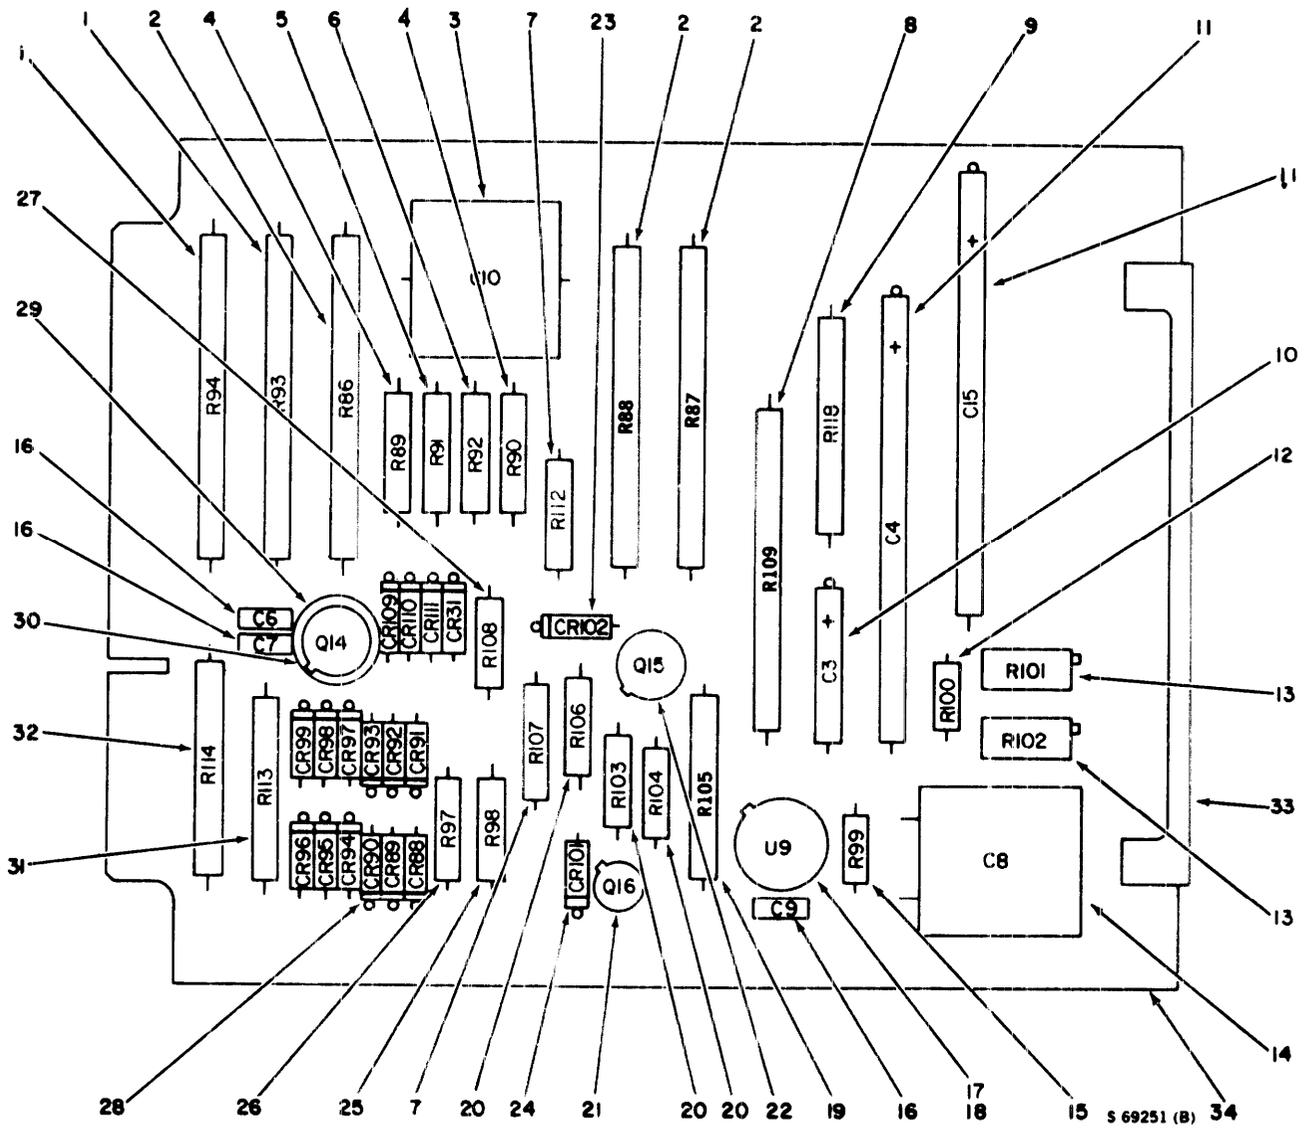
Circuit Card Assembly A3 Component Location Diagram
